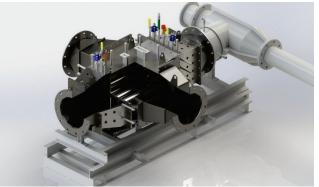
Equipment assembly (in partial section) with drive ejector on support frame
